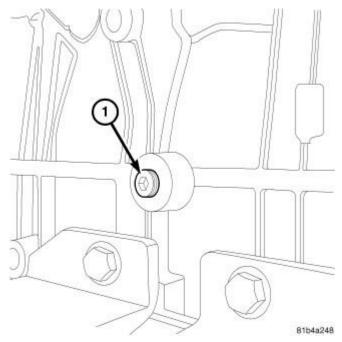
Engine Block Plug Courtesy of CHRYSLER LLC
